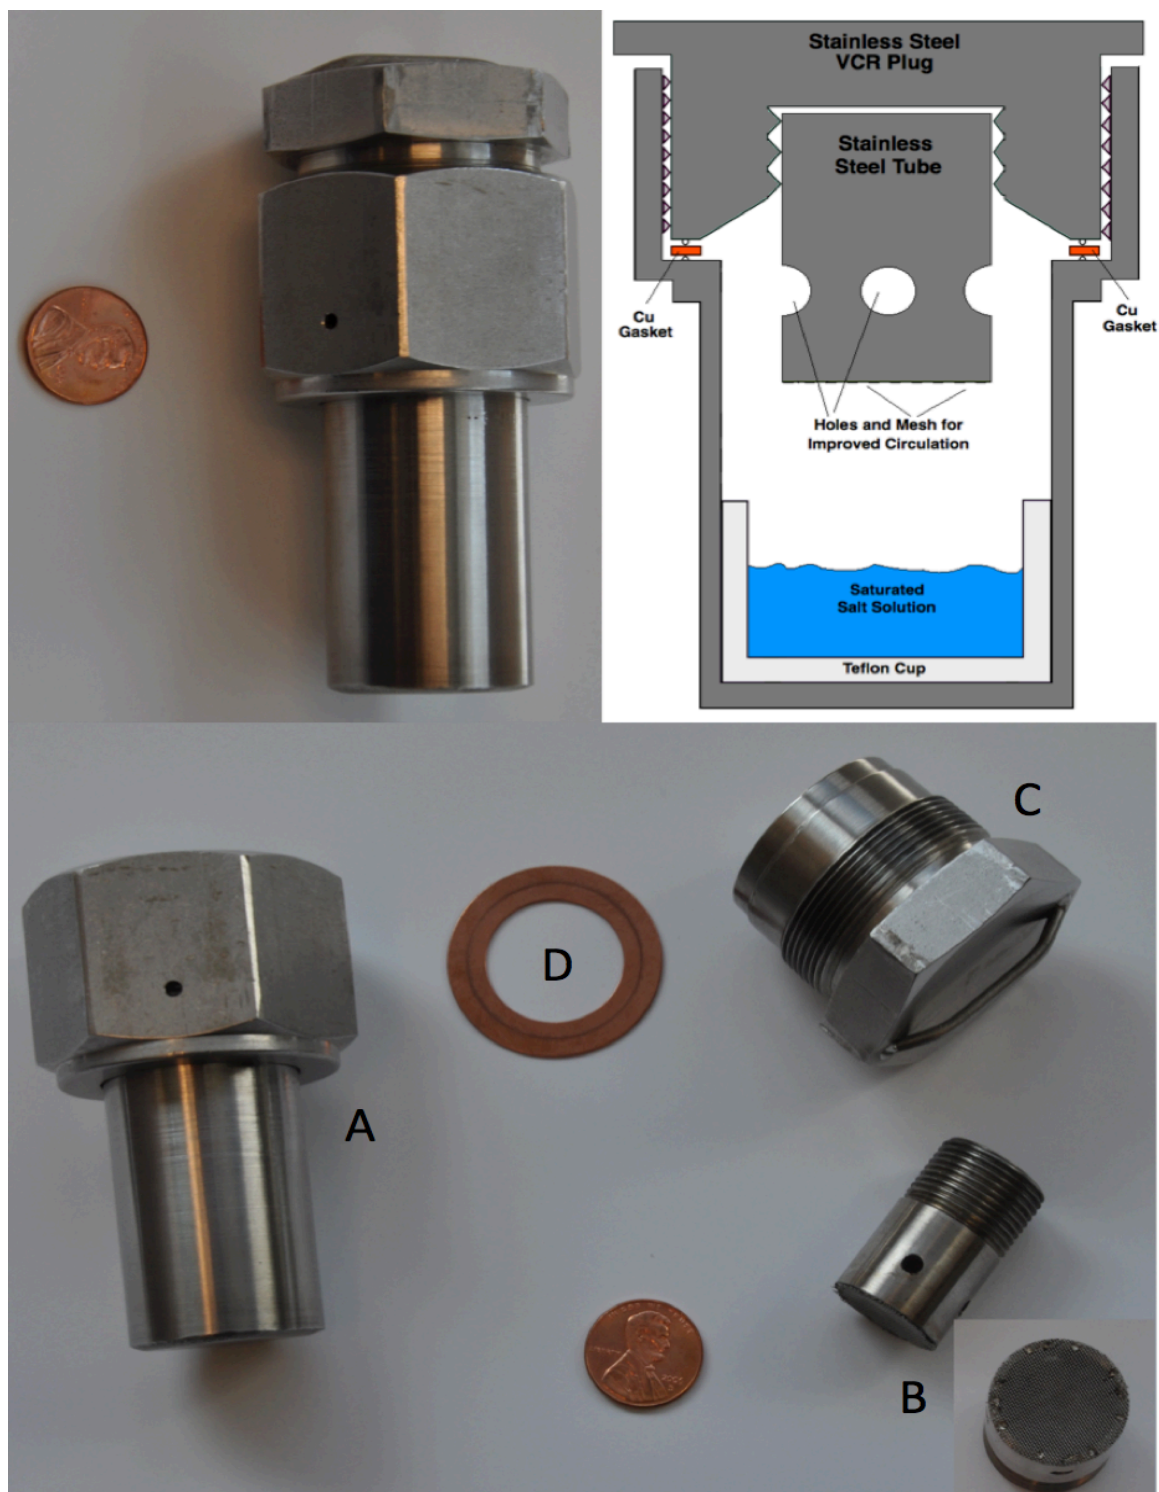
Photographs of an assembled aging vessel (top left) with cross section schematic (top right) and disassembled showing individual parts (bottom). Part A is the base of the vessel that holds a Teflon cup with the salt solution. Part B is a stainless steel tube with holes drilled in the side and a mesh bottom that contains a sample inside a polyfluoro vial. Part B is screwed beneath Part C, which is made of the stainless steel VCR plug and nut[131].
